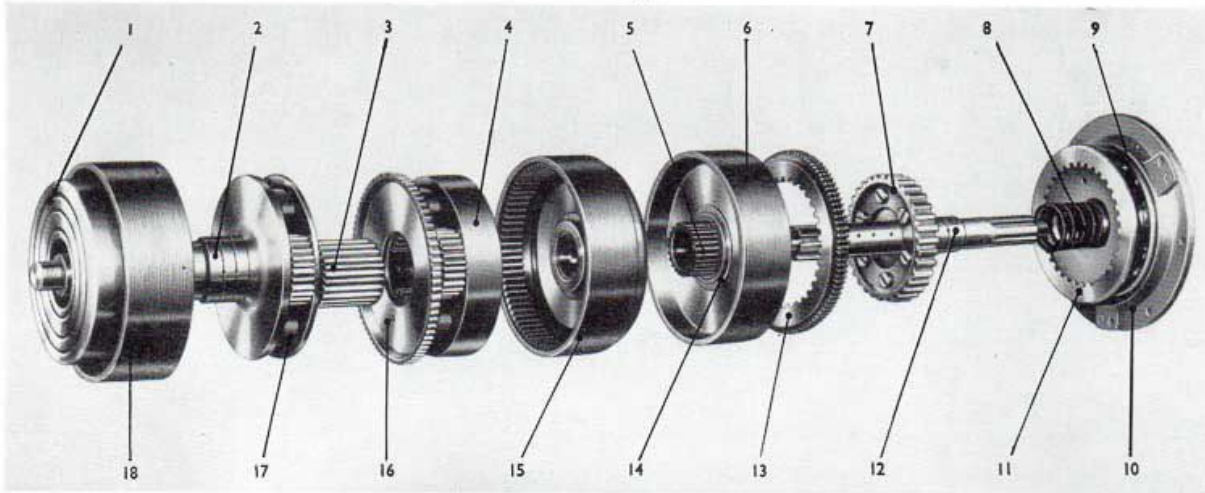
EXPLODED VIEW OF RUNNING GEAR (VIEWED FROM OUTPUT END).
